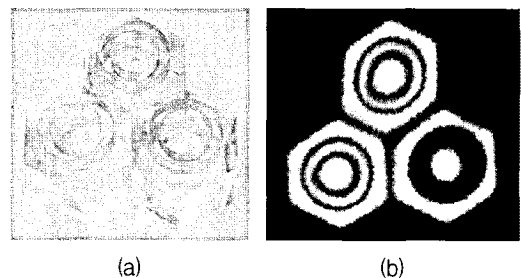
C-scan test of the test specimen with loose parts and slits; (a) Core mock-up, (b) C-scan image
